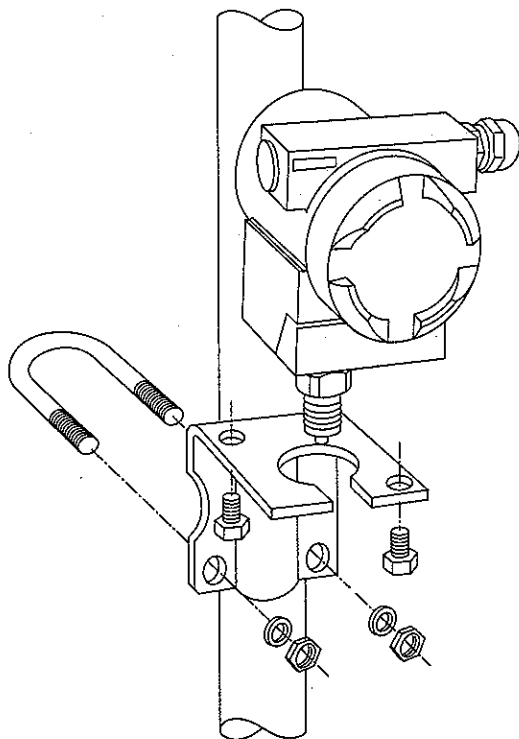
Fixing the SITRANS P transmitter using a mounting bracket
